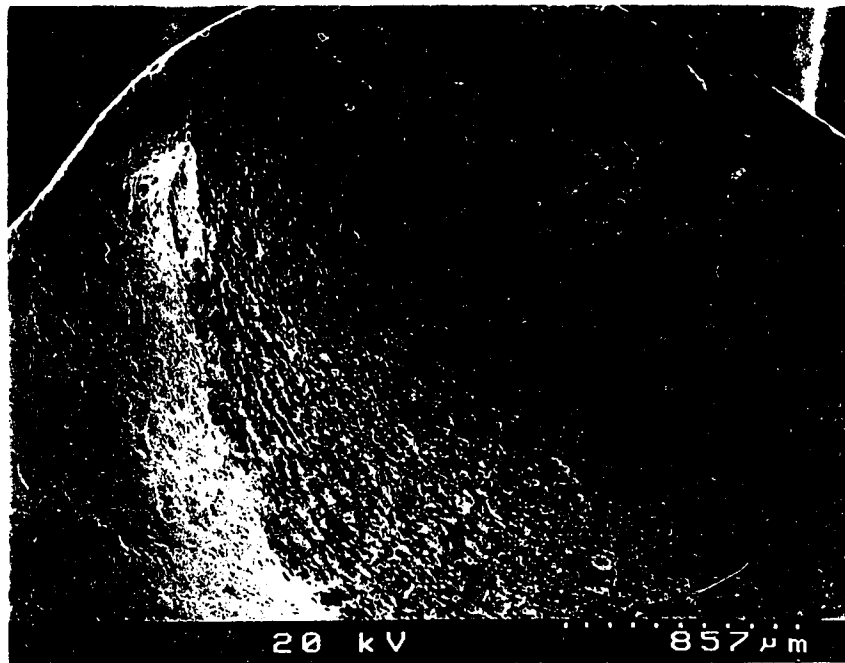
Electro photomicrograph of wire fracture surface for SP7—Layer 5
